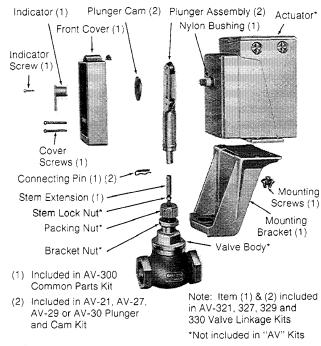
Assembly of AV-321, AV-327, AV-329 and AV-330 to Obsolete Valves.
